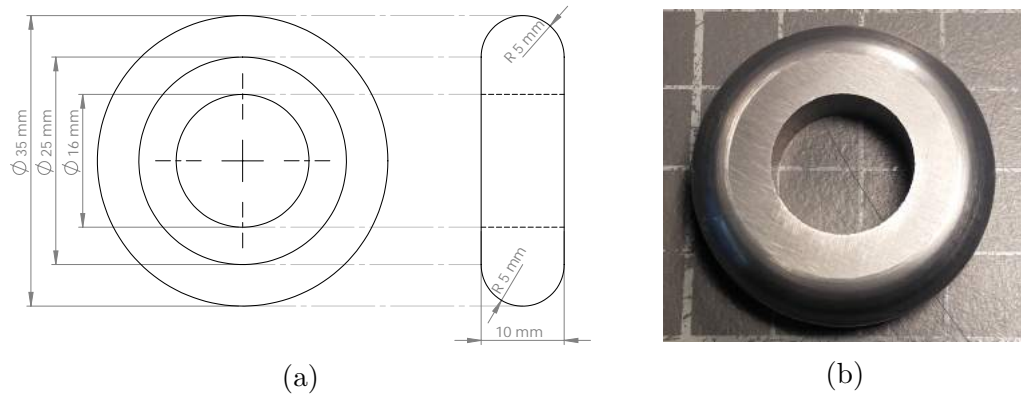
WC carbide wheel drawing (a); WC carbide wheel specimen (b).
